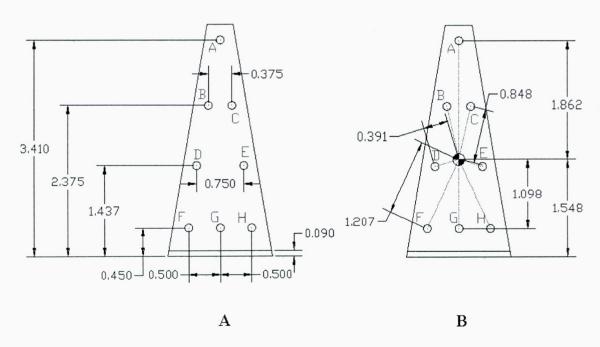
Roof Fitting Bracket, Dimensions
